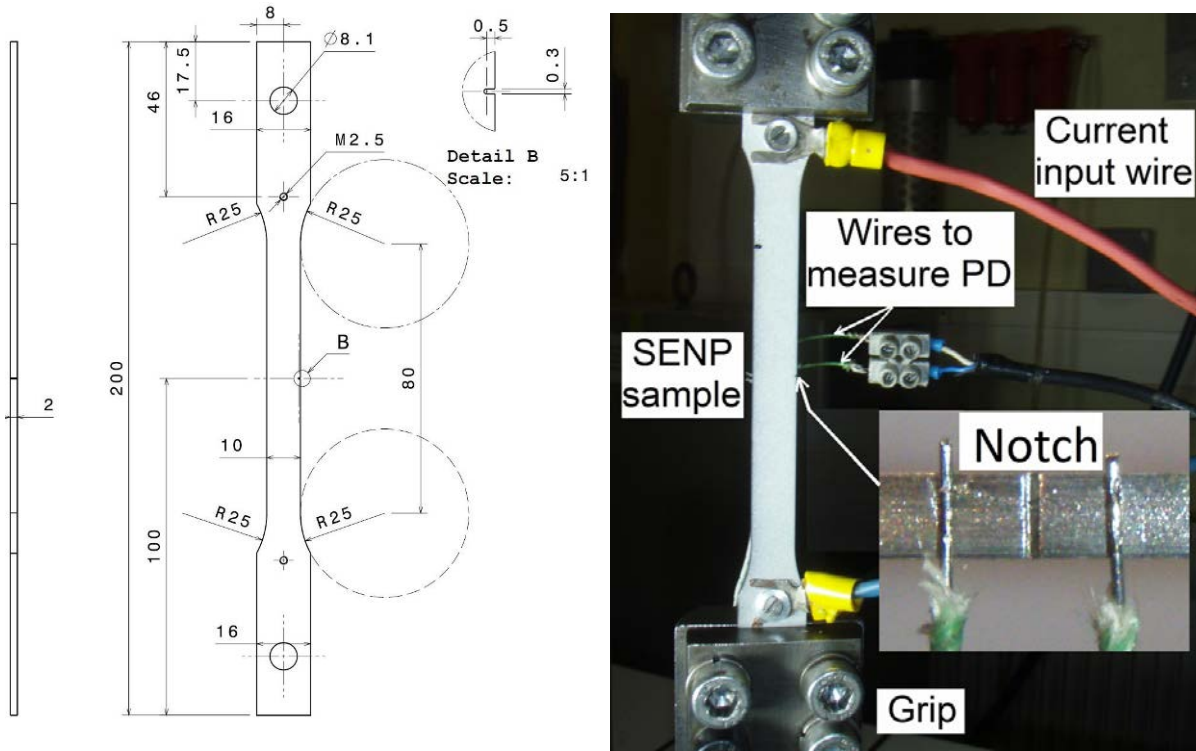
Fracture test SENP specimen (left) and fatigue test set-up (right) in our investigation
